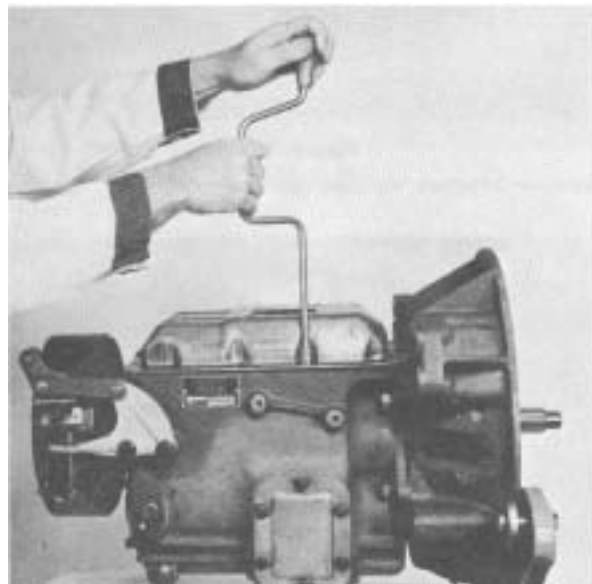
Tighten shift support cover bolts 20 to 25 ft. lbs. torque [27,3 - 33,8 N.m.].
